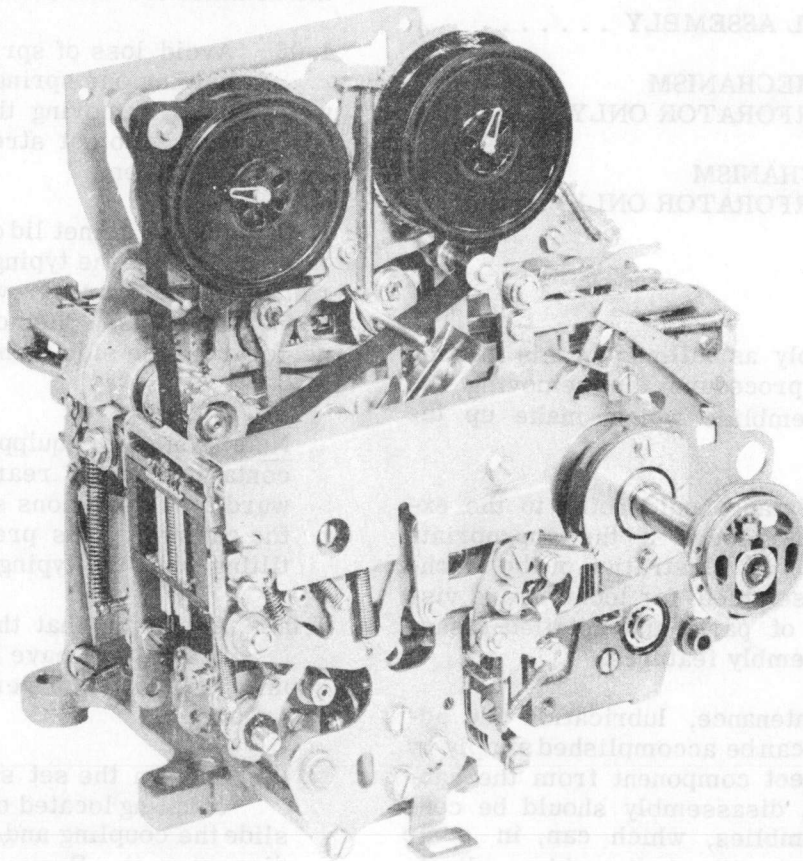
28 Typing Perforator - Chadless Tape (With Backspace Mechanism)
